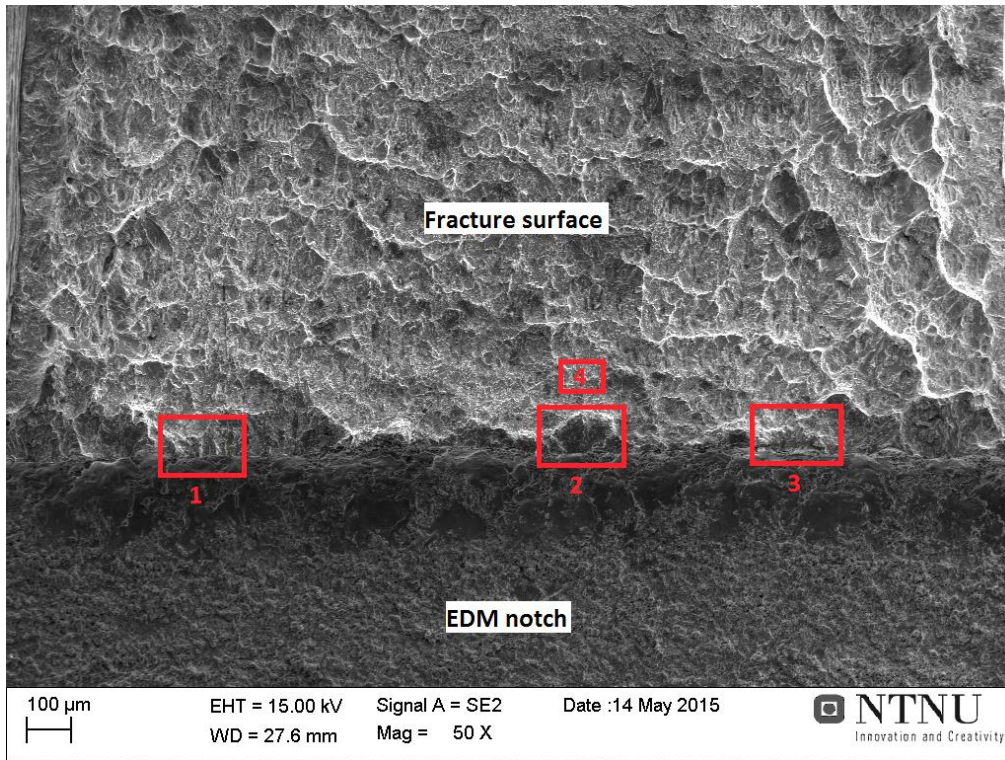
Sample B, test 4, fracture surface on clad section of specimen.
